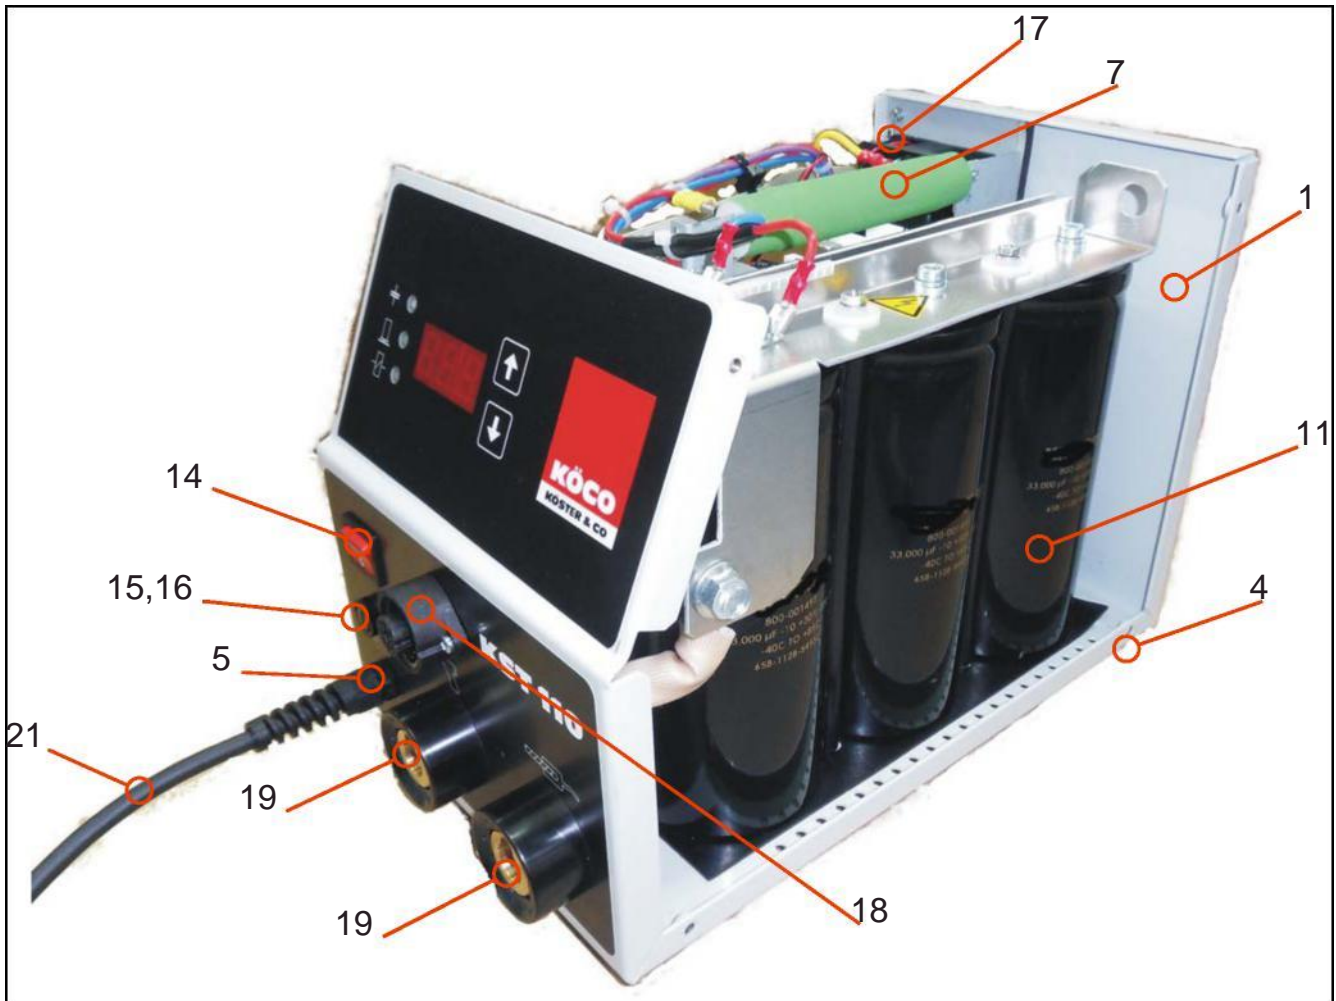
Right-side view (rear) of KST 110 with the cover removed
